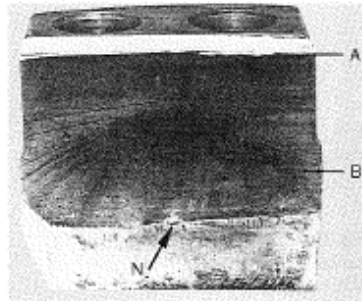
Exposed fatigue and laboratory-induced residual force fracture, with crack initiation site marked at N (A: laboratory force fracture; B: fatigue crack).
